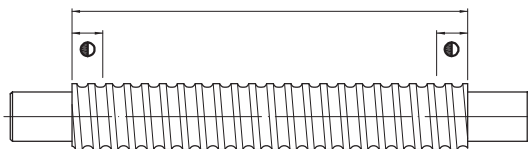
Area of surface hardening on a ballscrew shaft
